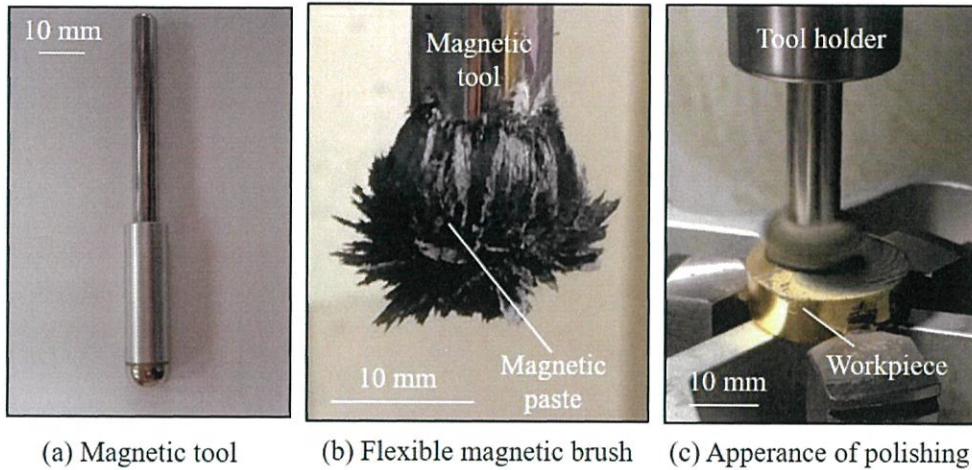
Overview of magnetic abrasive polishing on 5 axis machining center
